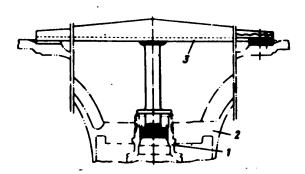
An Assembled Compressor Rotor With the Center Ball Bearing for Checking and Adjustment of Clearances
